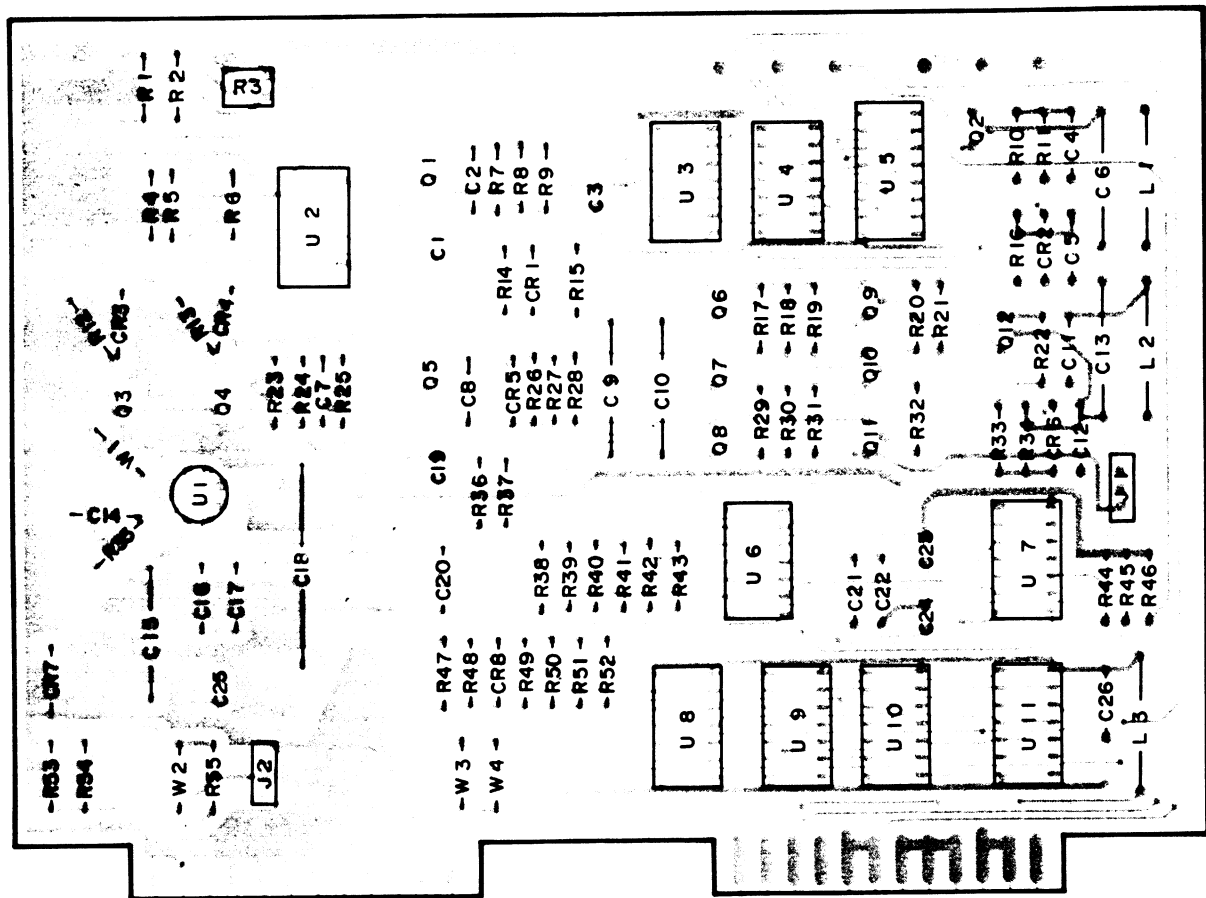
All Integrator Amplifier Board Assembly Component Locations.
